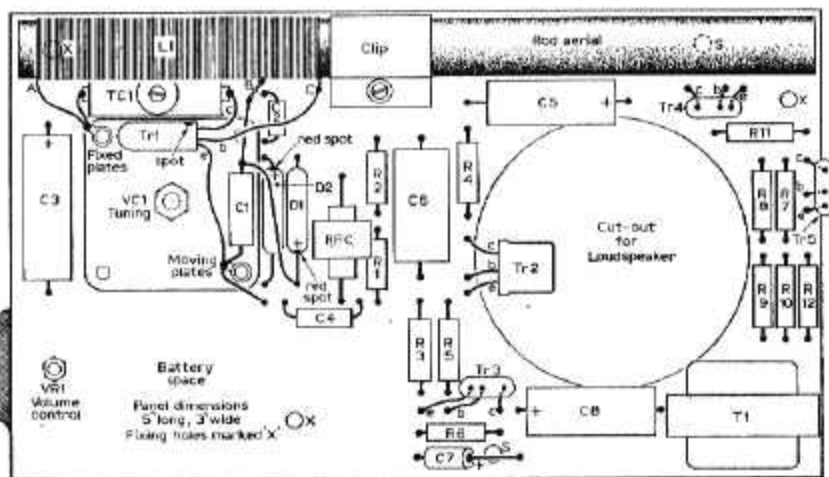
Component layout. The volume control VR1 is mounted on the reverse side (see Fig. 3).
